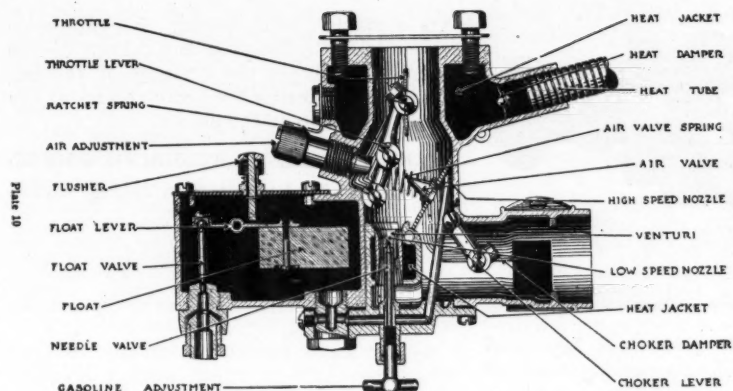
Sectional view of the Marvel carburetor as used on the Buick car. There are two adjustments, air and gasoline
